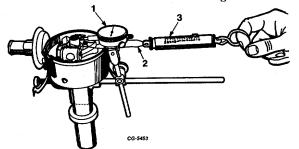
Shaft and Bushing Wear Test (Checking Distributor Shaft Side Play)
